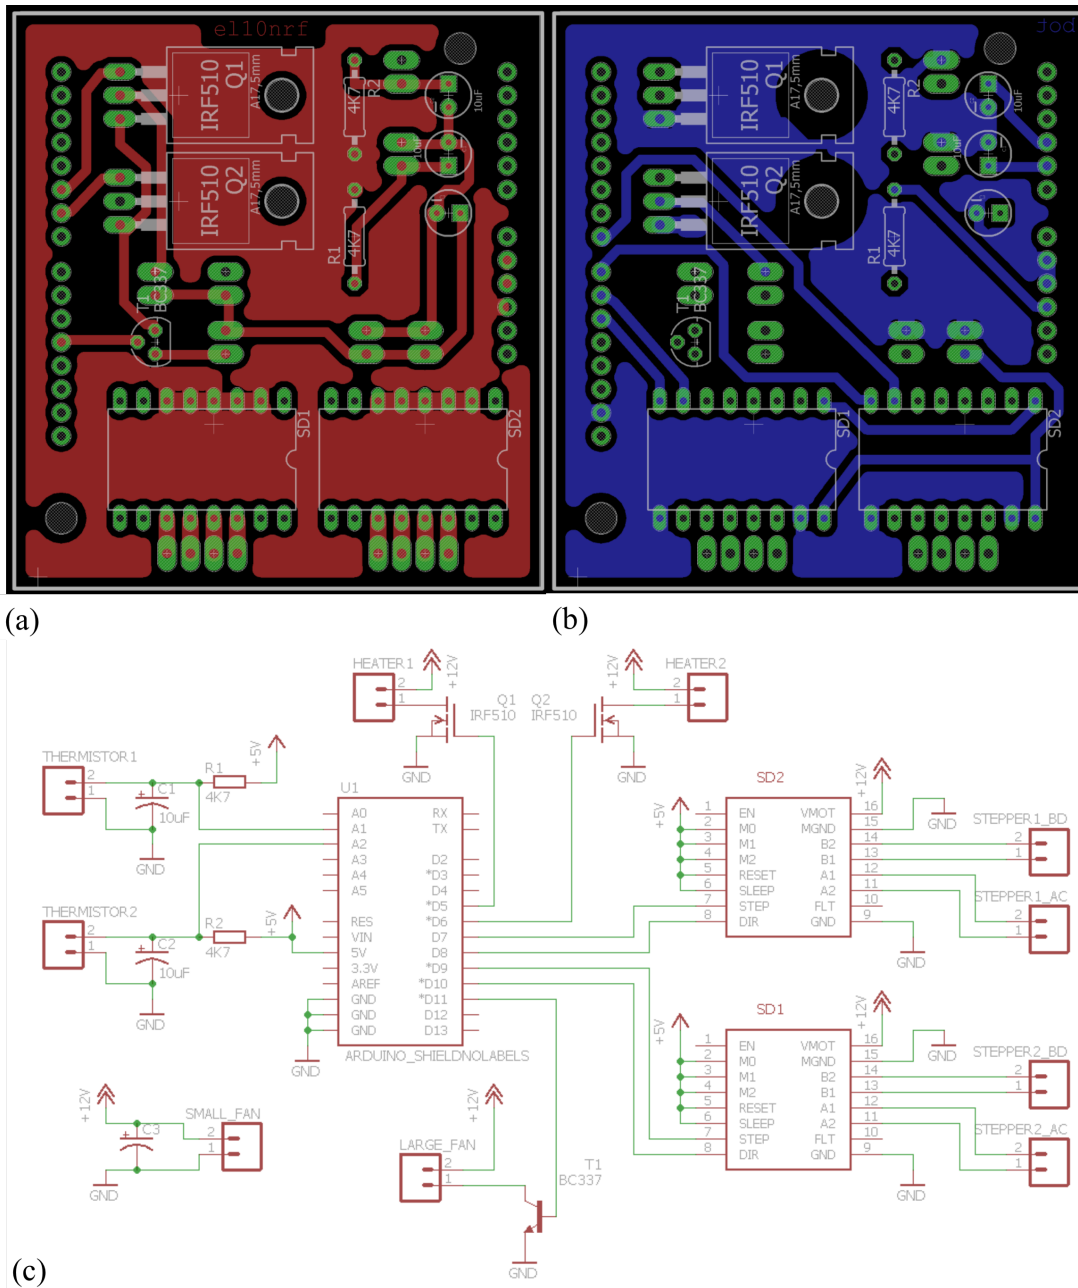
PCB track layout - (a) Front and (b) Back. (c) Circuit diagram of the extruder Arduino Uno Shield.
